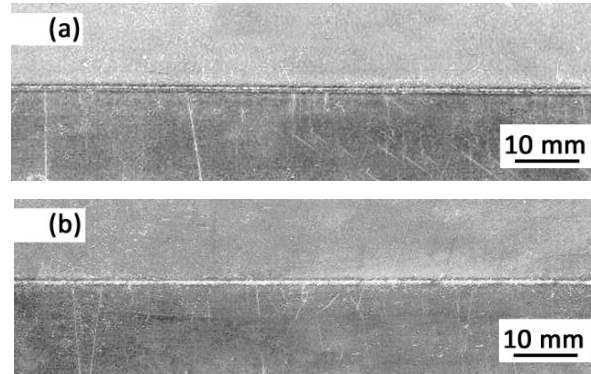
Bead (a) topside and (b) backside surfaces appearance; Haynes above, Inconel below
